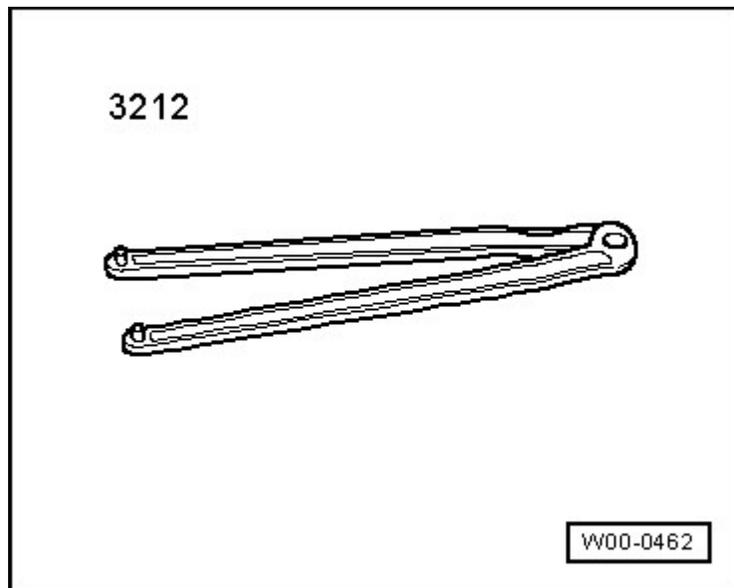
Identifying Special Tools - Pressures, Checking
